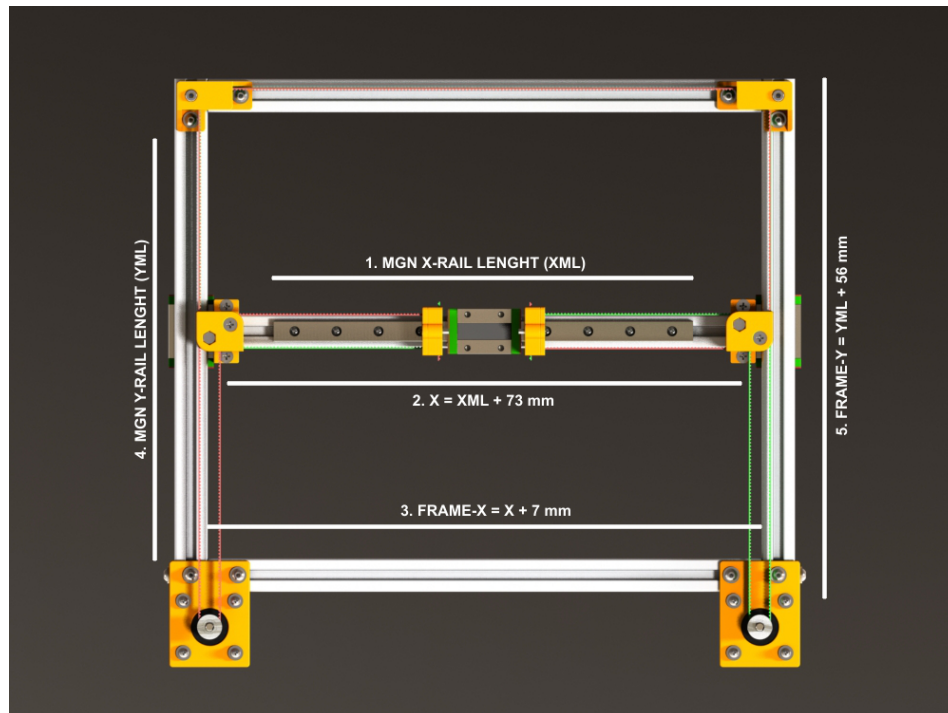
Dimensioned CoreXY layout used for frame sizing.
